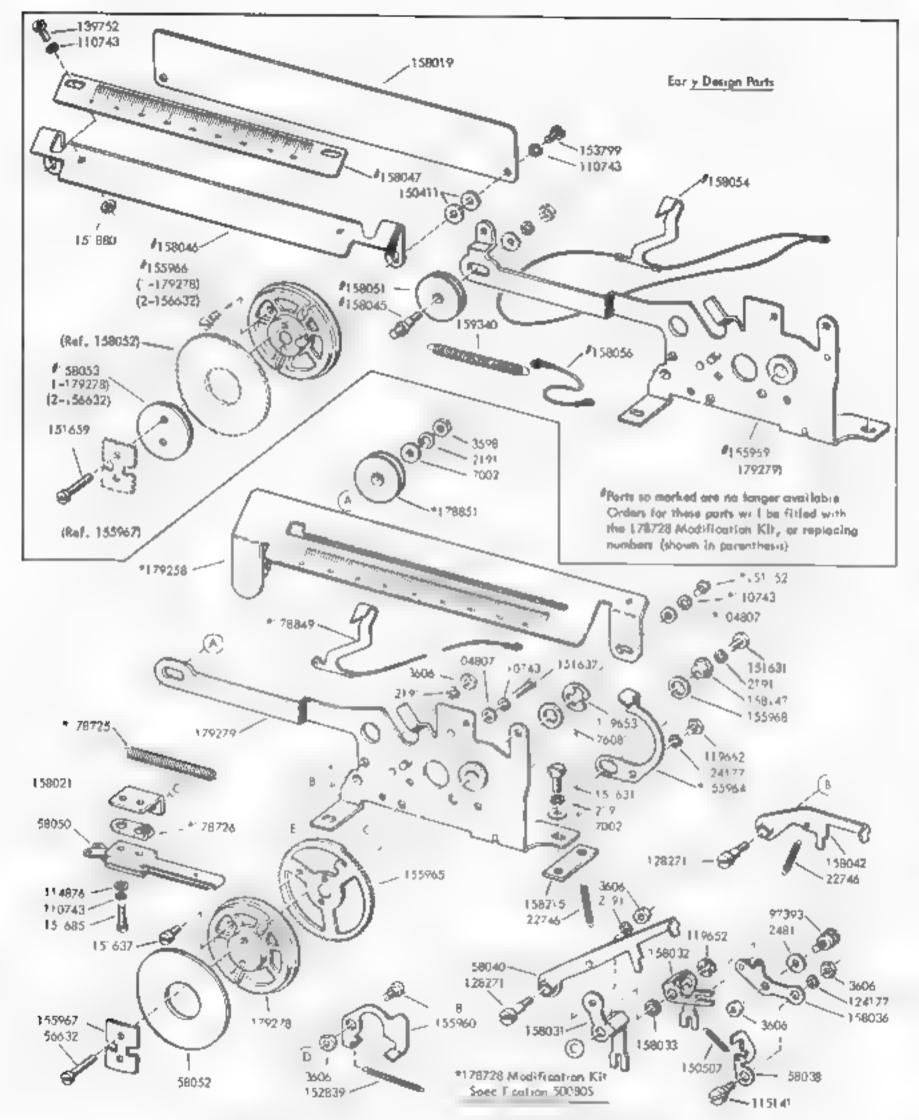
155990 CHARACTER COUNTER ASSEMBLY
